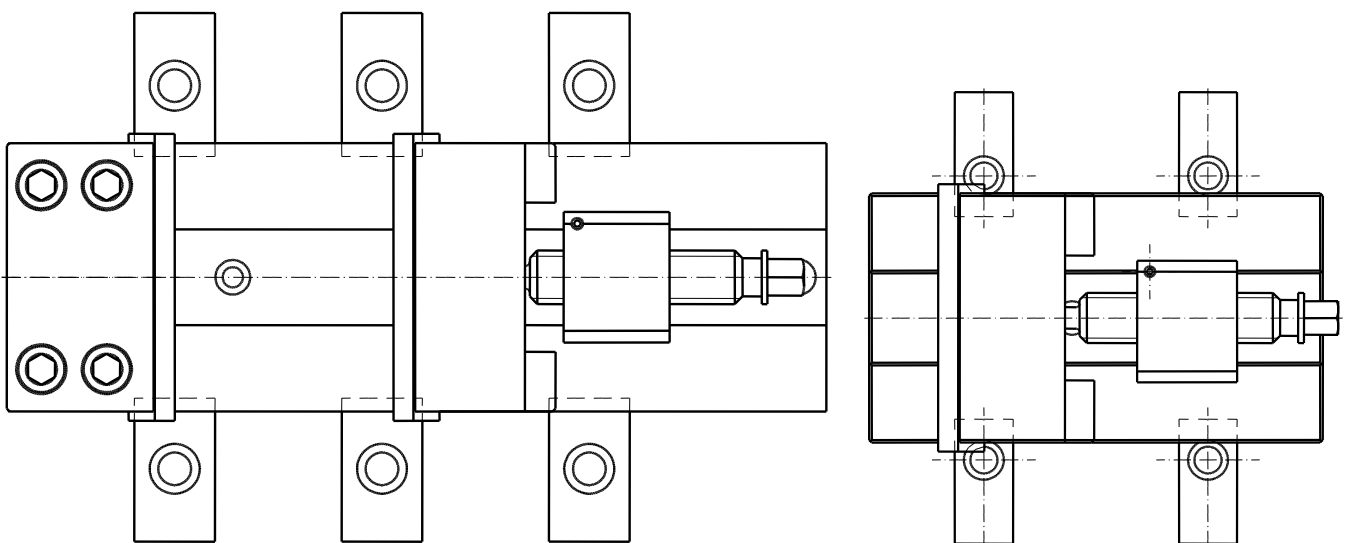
The way of fastening machine vises of 6620 type on machine-tool table.
